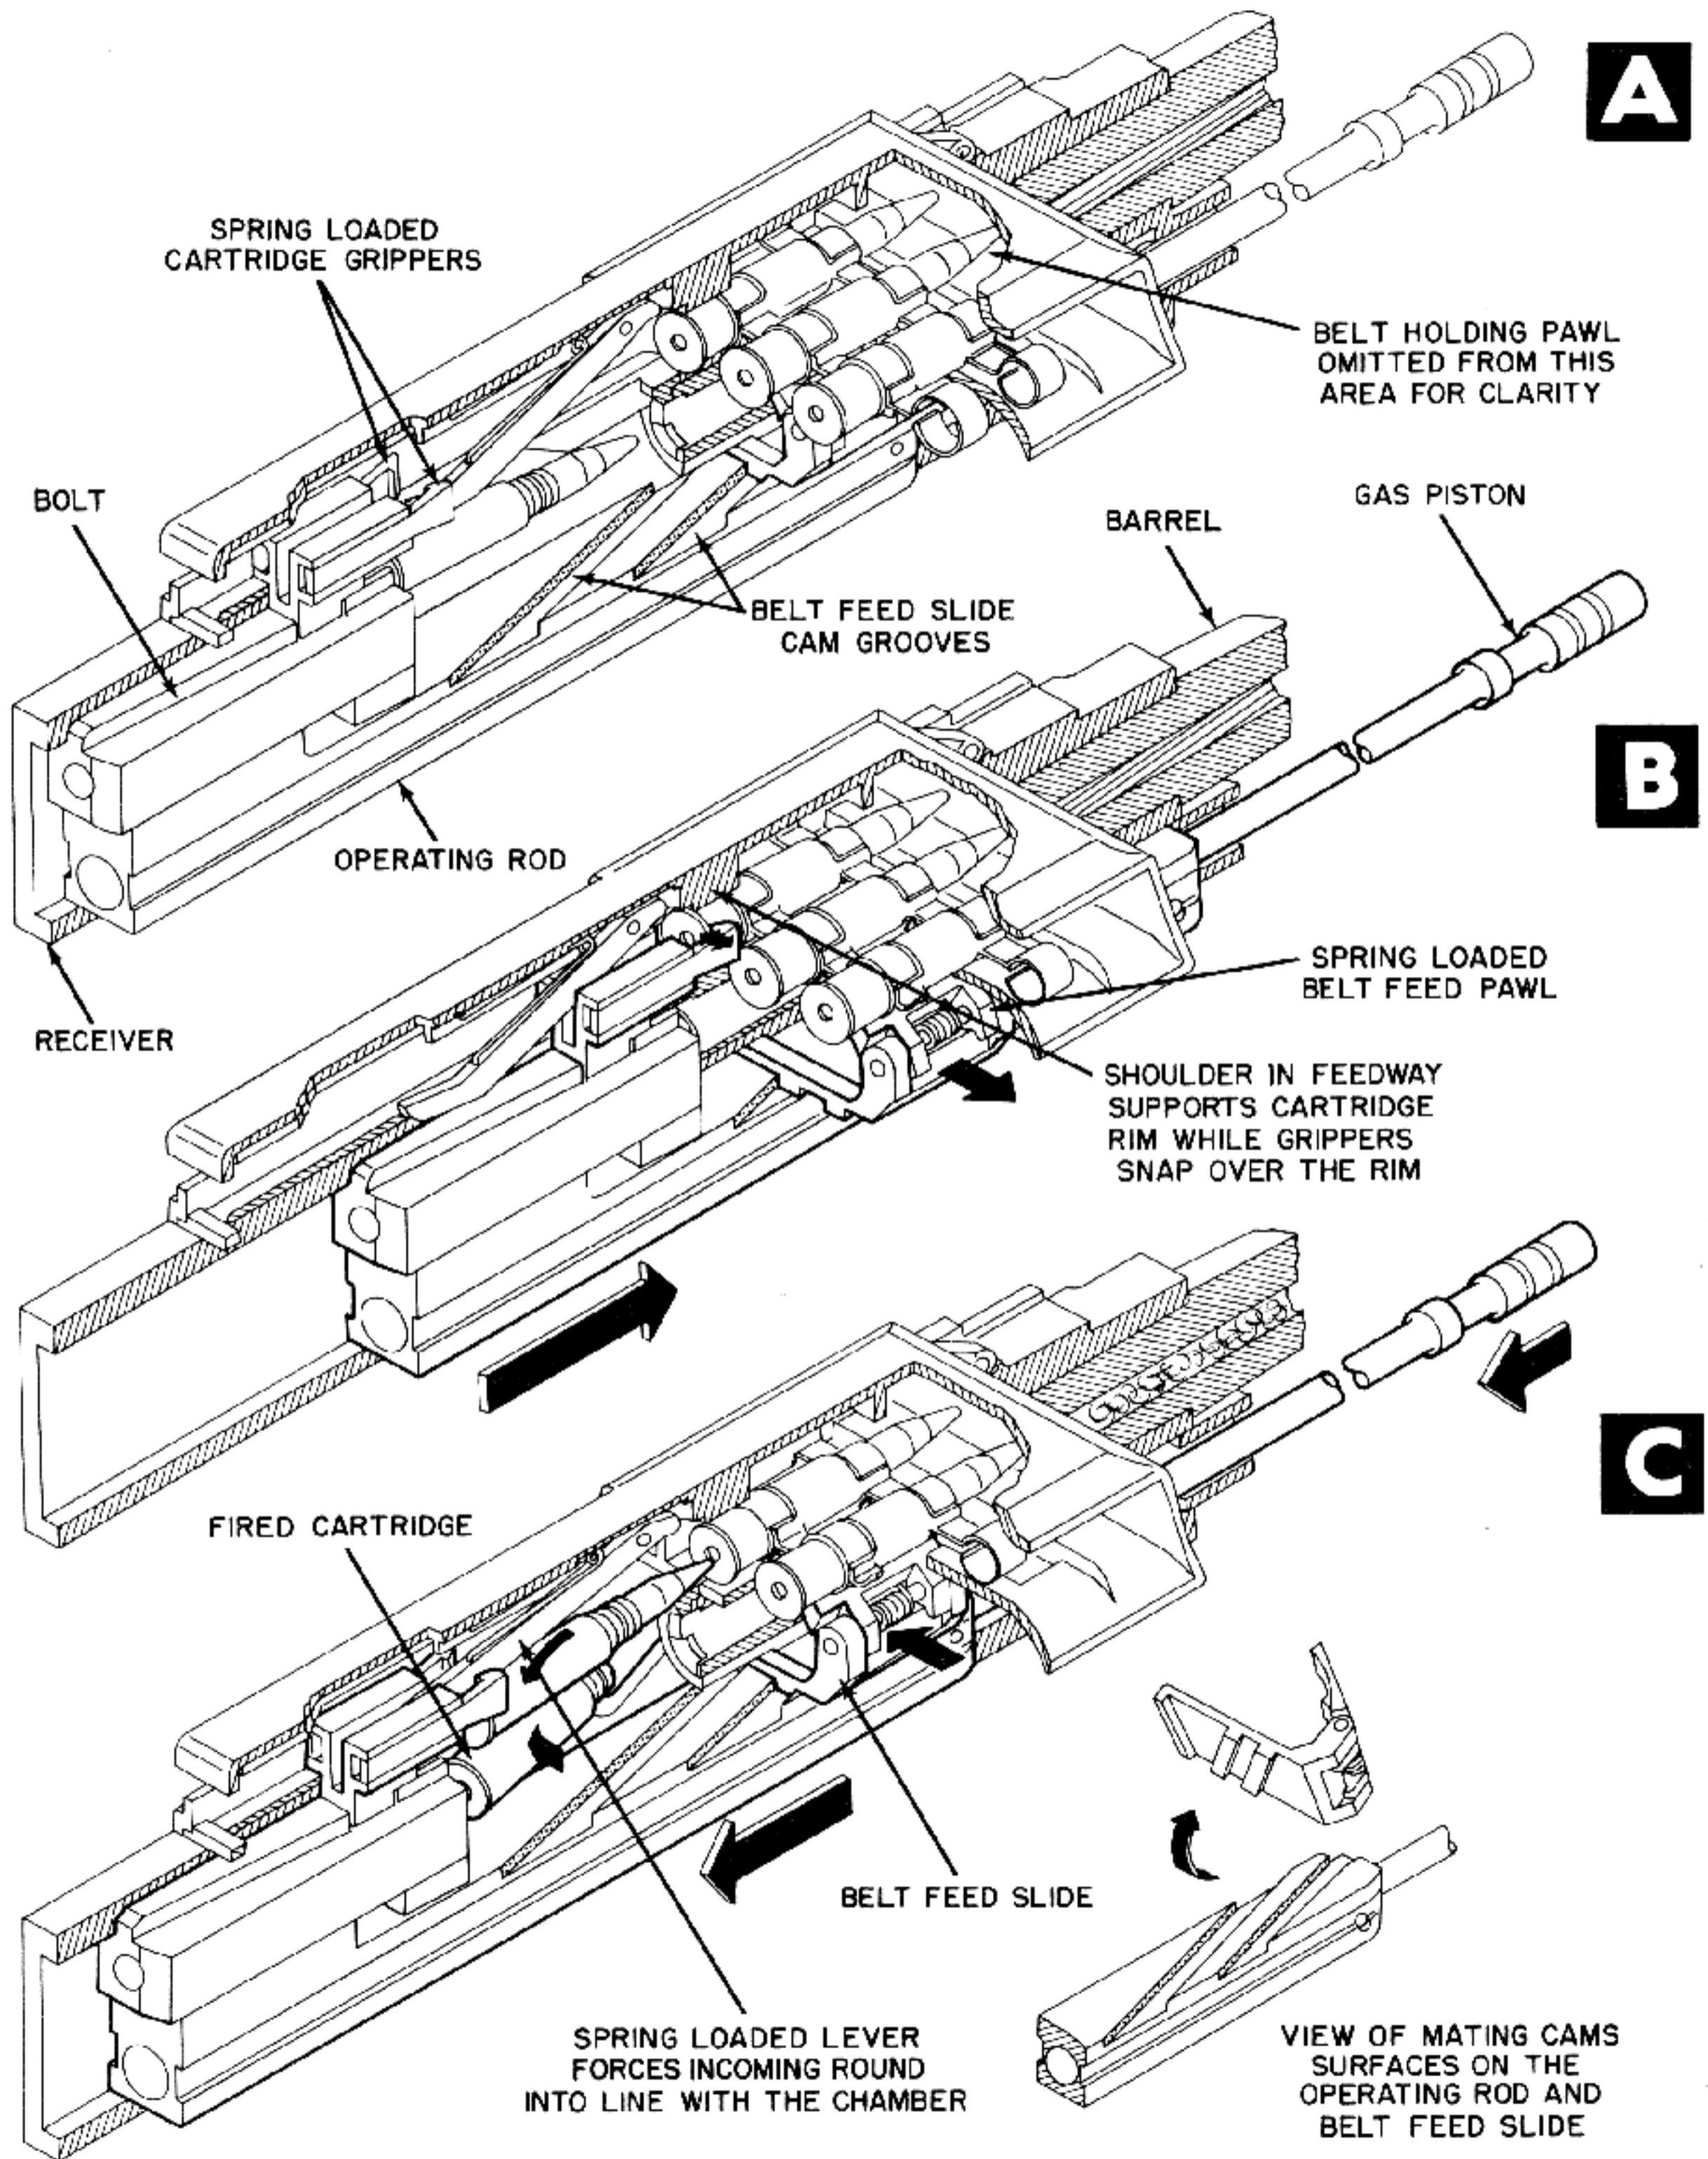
Cam Grooves on Operating Rod Actuate Belt Feed Slide.
